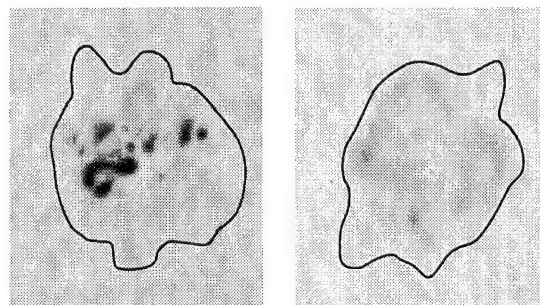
Ultrasonic C-scans showing in-situ repairs to impact damaged wing skin. (a) reduced pressure. (b) reduced hole depth.
